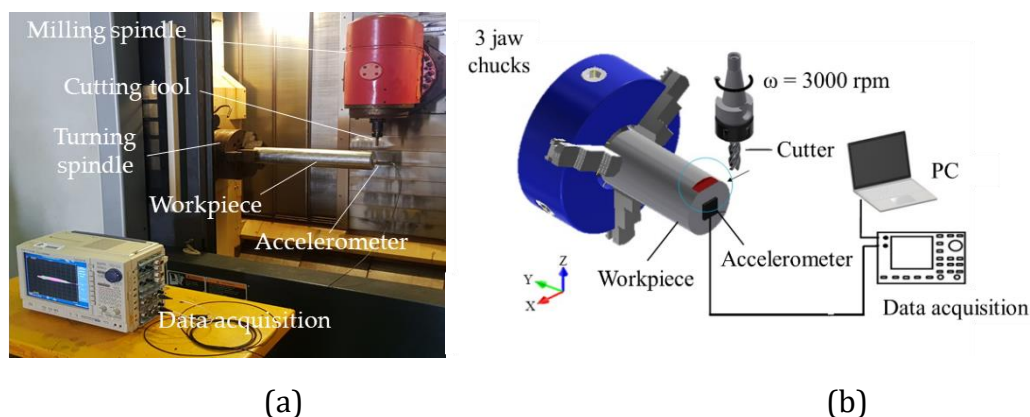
Measuring vibration data during cutting test; (a) Experimental setup in CNC Turn-Milling machine of 5 Axis Mori Seiki NT 4300, (b) Schematic diagram of cutting test
